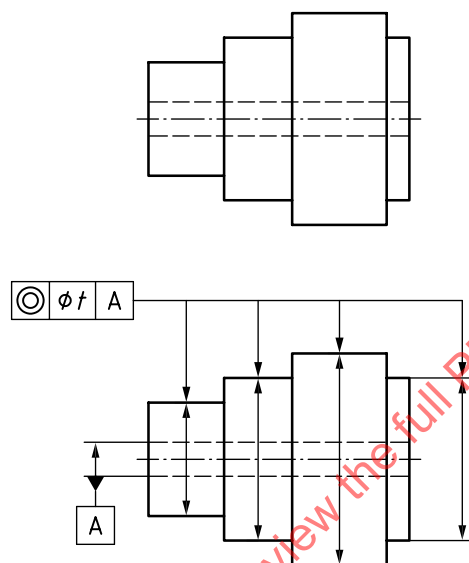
Drawing and meaning of general coaxiality tolerances, single datum
